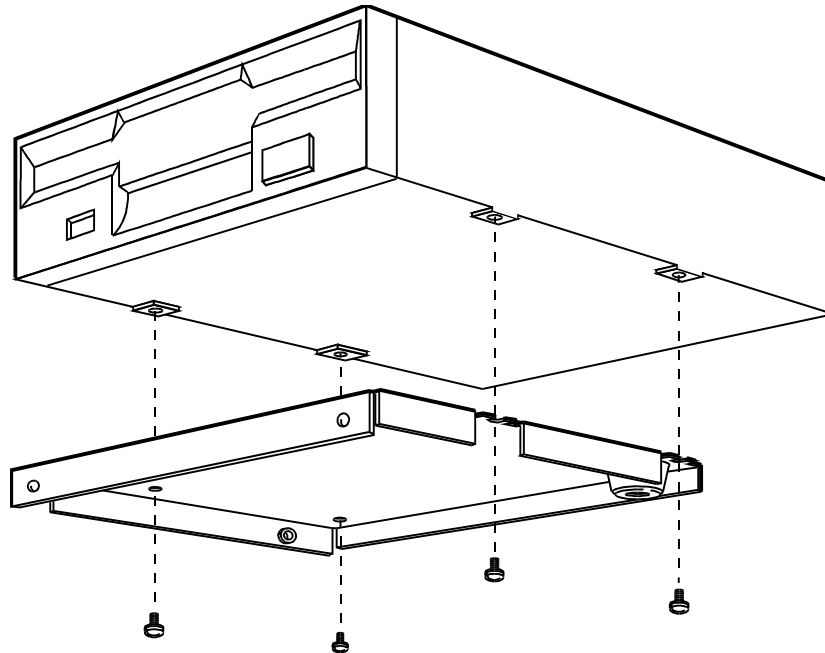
7. Mounting a 5.25" Device to the 5.25" Drive Mounting Plate
